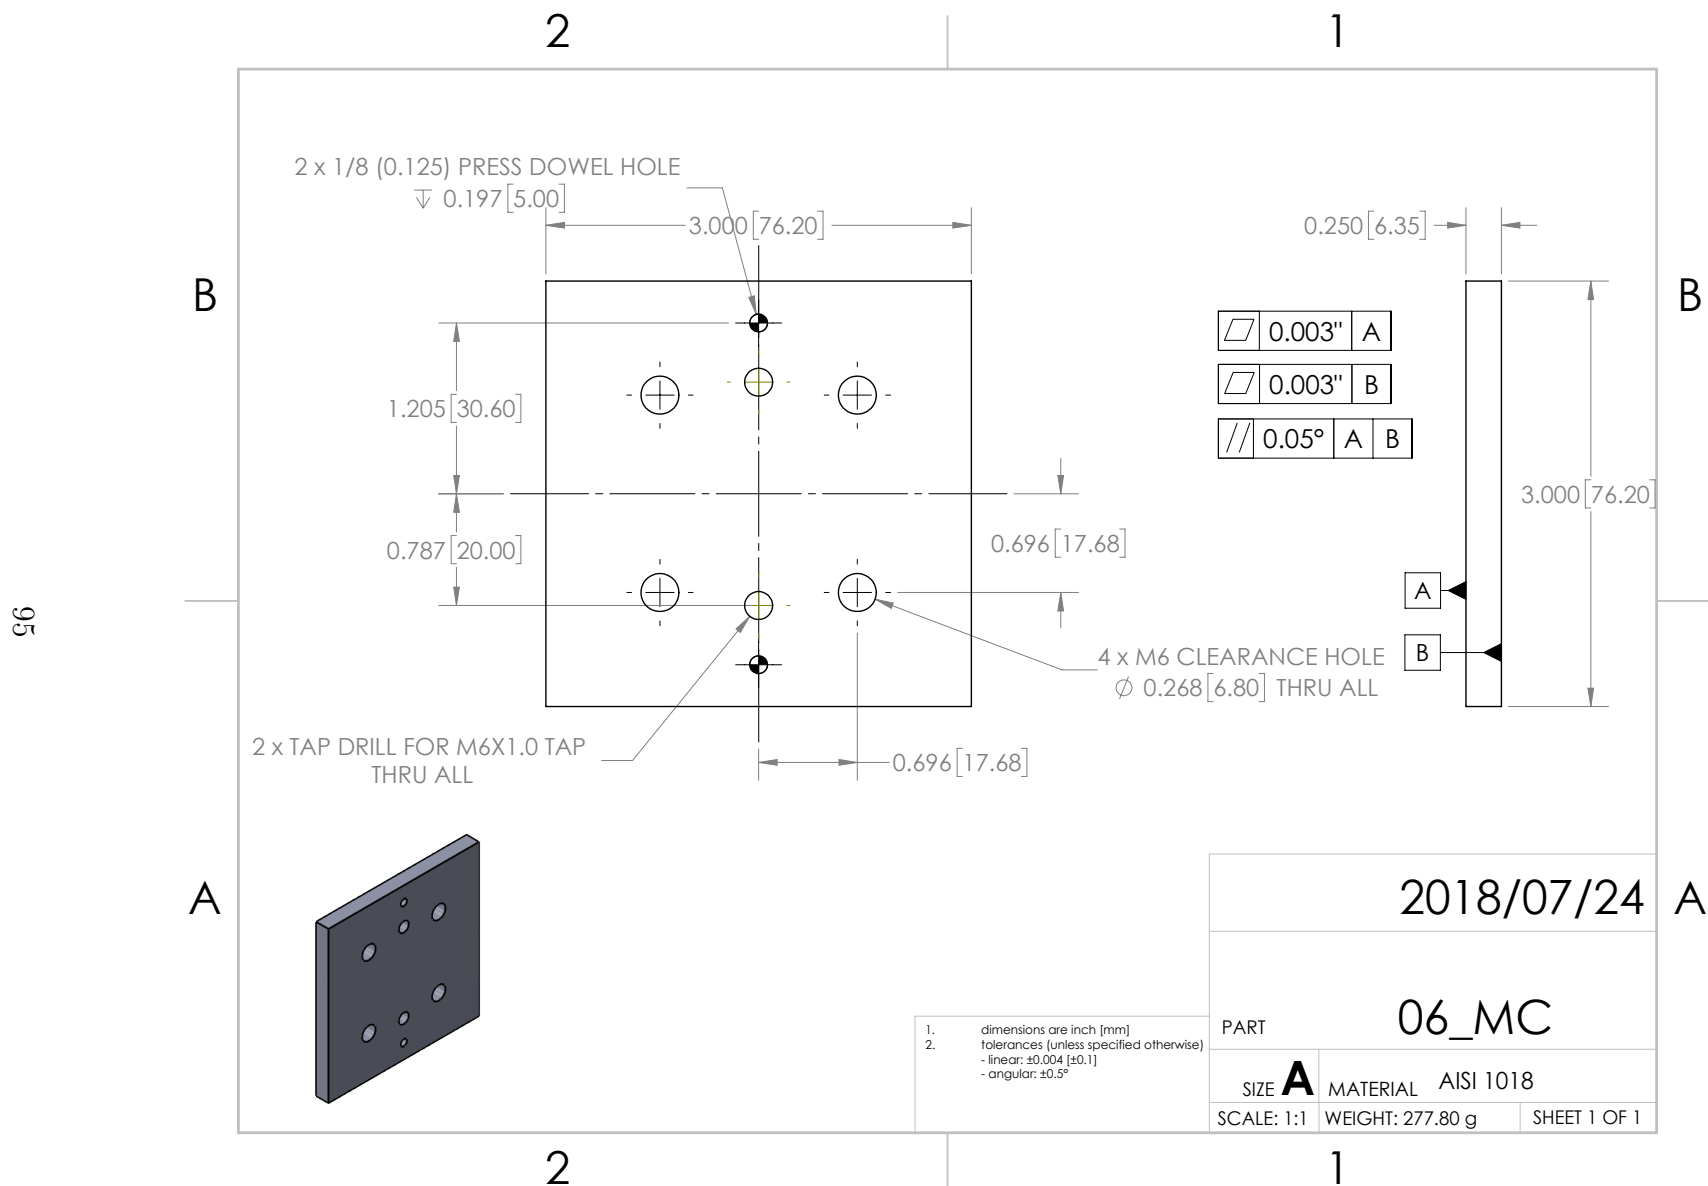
Fixture plate for mounting the fixture arm (07_MC) to the load cell.
